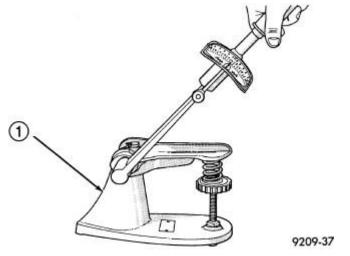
Testing Valve Spring with Tool C-647 Courtesy of CHRYSLER LLC
